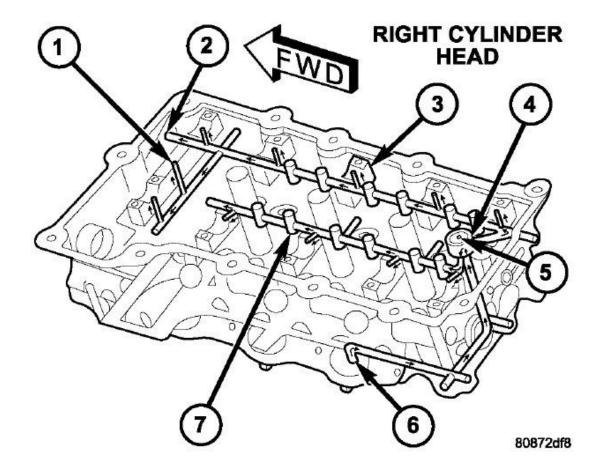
Cylinder Head Oil Lubrication System - Right Side Courtesy of CHRYSLER LLC
